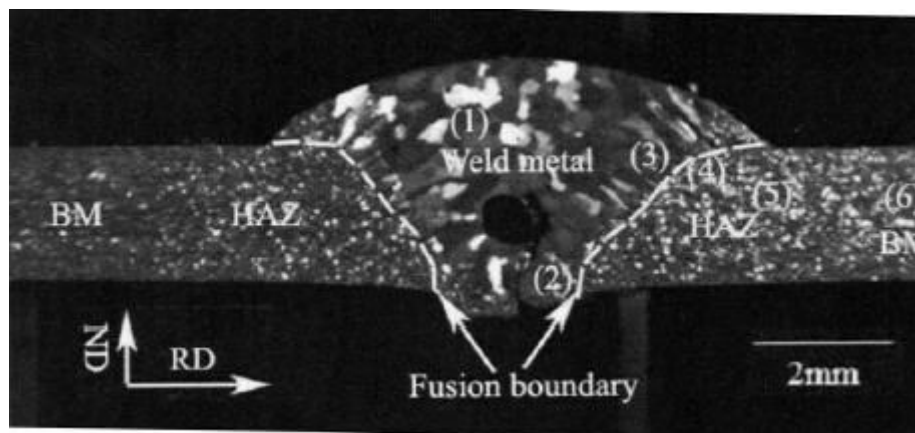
Cross-section of weldment 5 [82]
